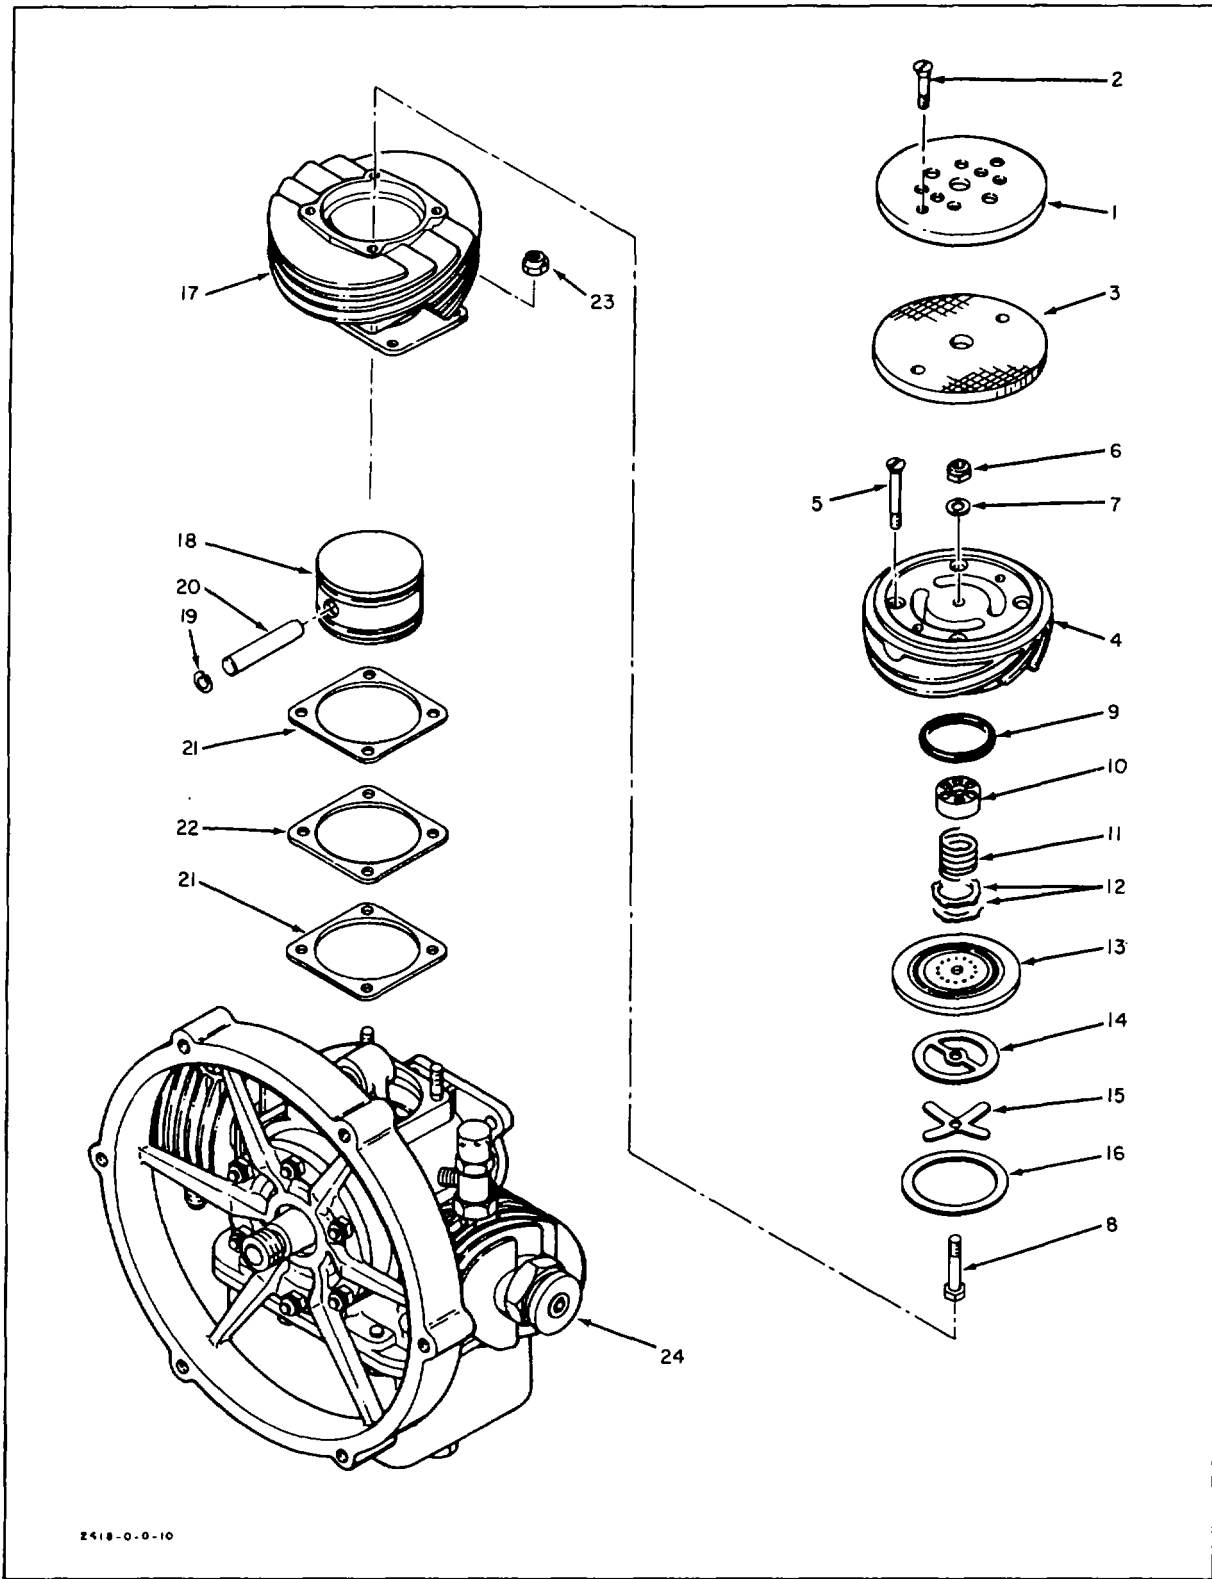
First Stage Cylinder, Piston and Valve Assembly
